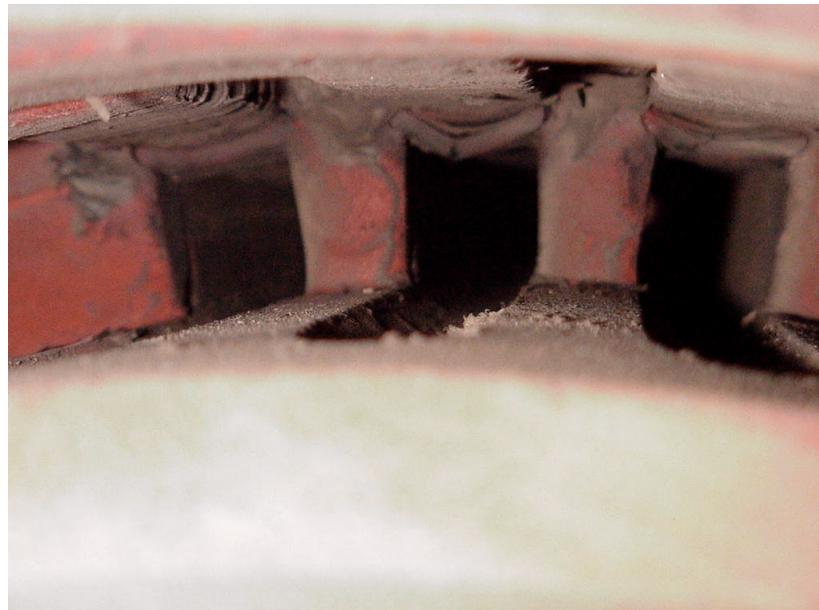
, Fractured Sub-slot Filler, Exciter End
